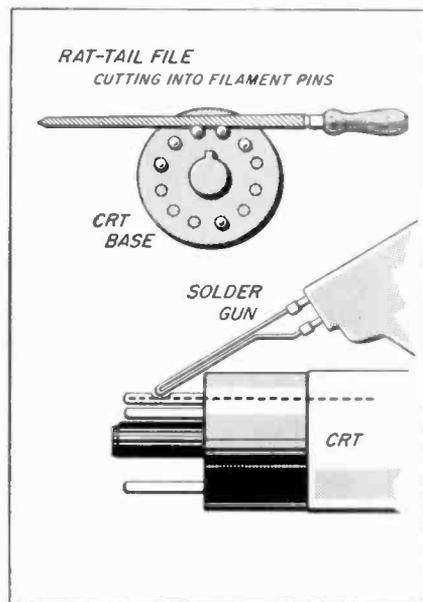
CRT's with cold-solder filament connections can be permanently saved by baring the pin's heater wires before soldering.
